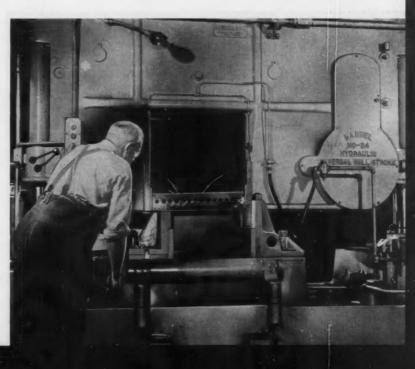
The impressions for a track link forging die are being sunk automatically on this tracer-controlled milling machine.
